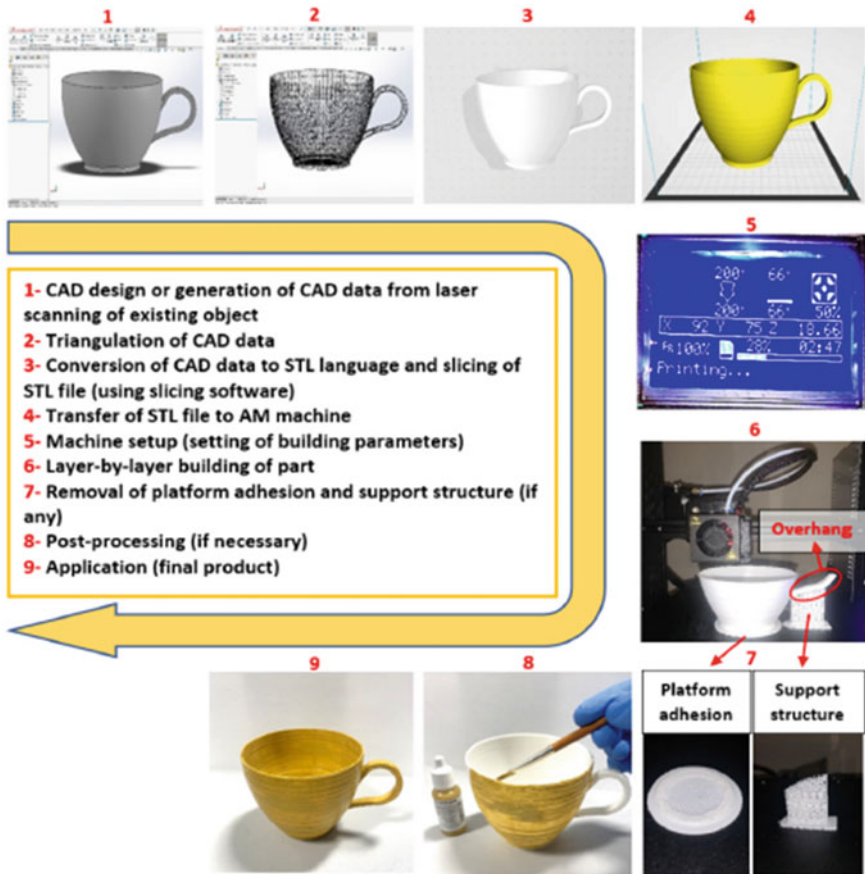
Standardized additive manufacturing method based on extrusion, starting with CAD renderings [15]
